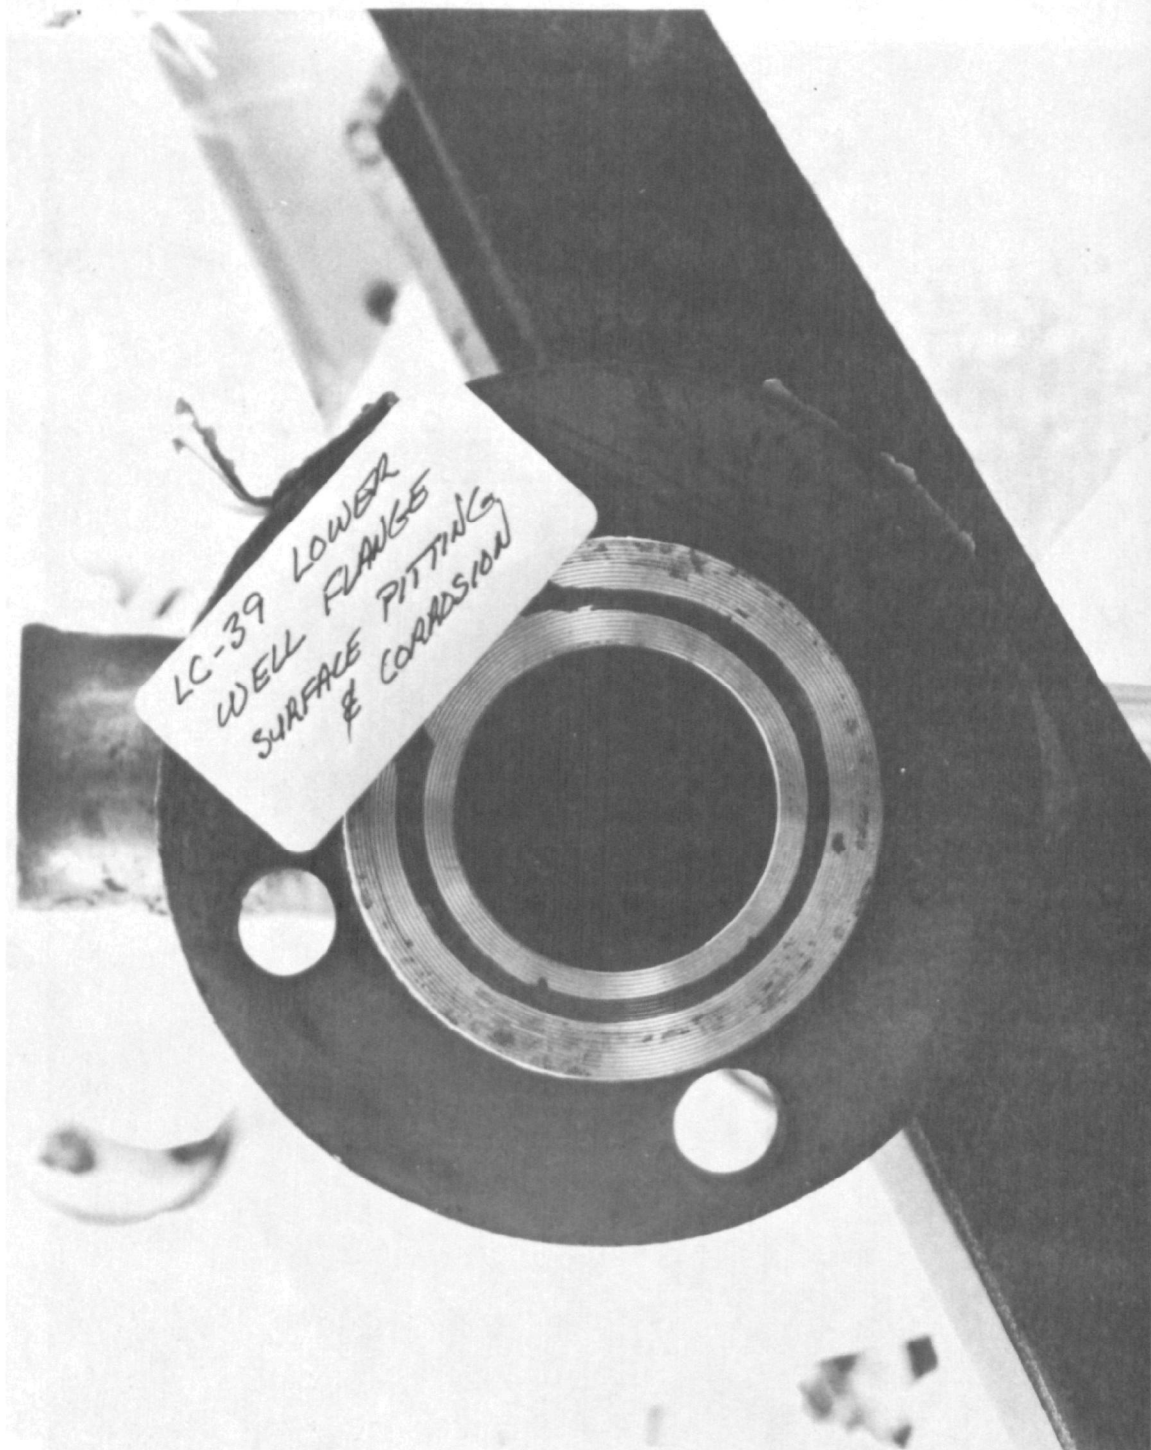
Lower Flange Face on Level Controller LC-39 for Knockout Drum V-1.
